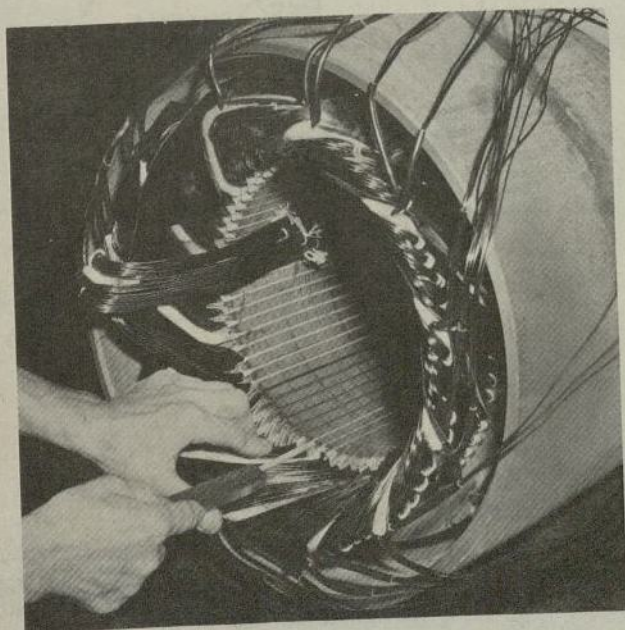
Winding and insulating a three-phase stator. (Wagner Electric Company)
